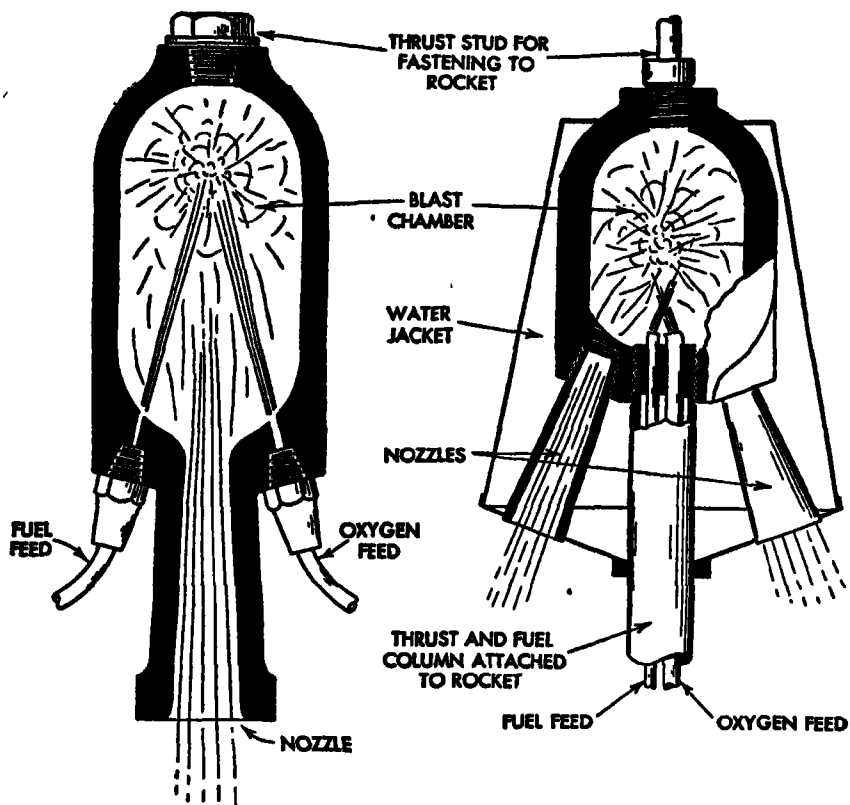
Two early types of liquid-fuel rocket motors. *Left*—the original ARS motor, designed by the author and H. F. Pierce; *right*, a four-nozzle motor designed by John Shesta for the ARS No. 4 rocket.
